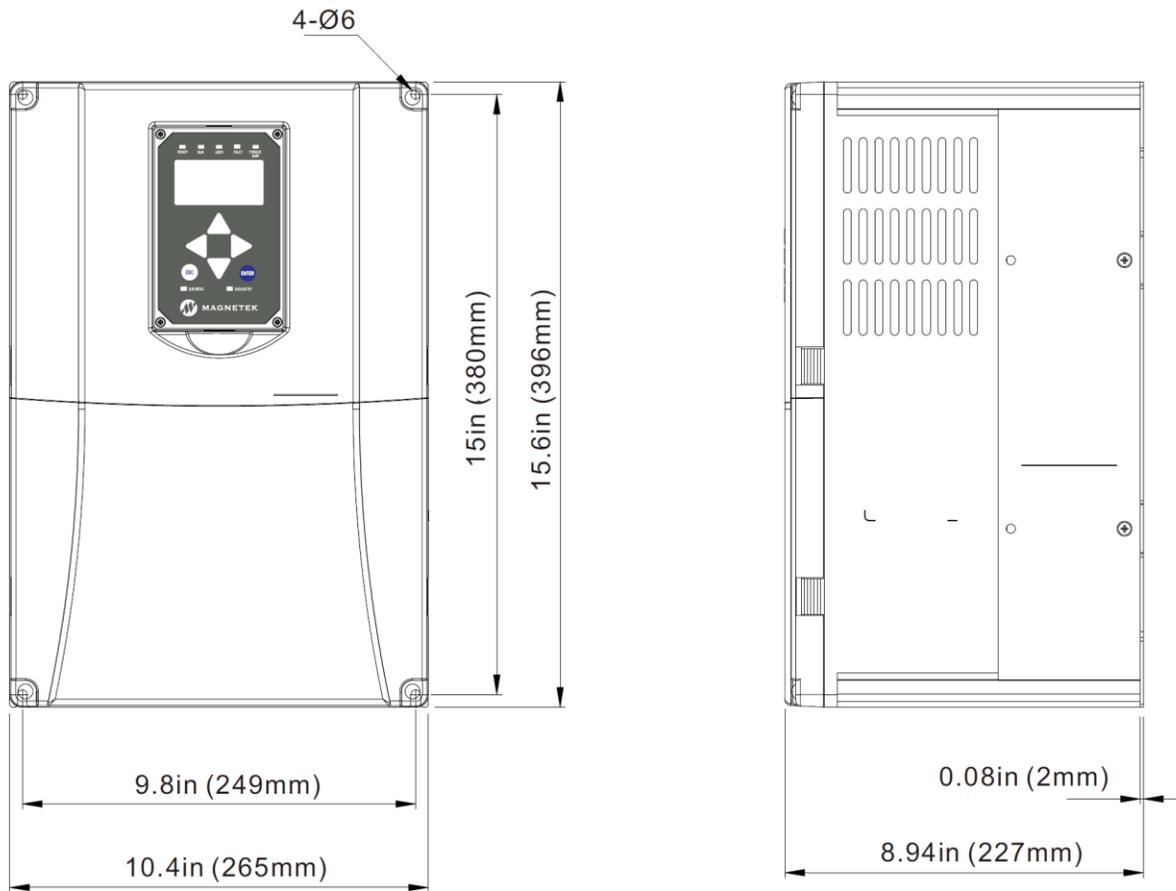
Frame 1 Dimensions, Mounting Holes, and Weight
